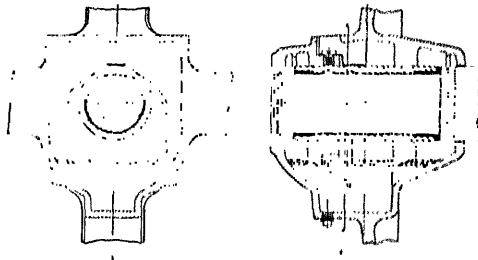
Cross-section of sleeve bearing and bearing housing.
